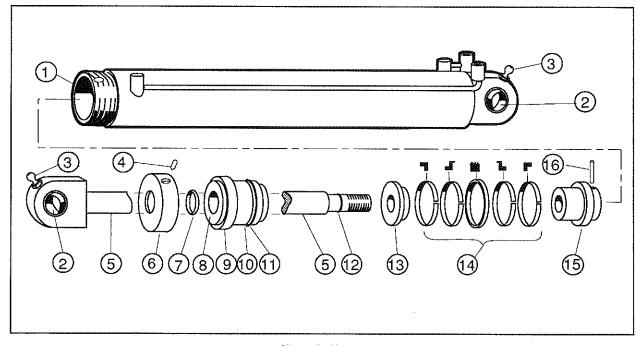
Hydraulic Ram, Type 'C' Extending Boom
